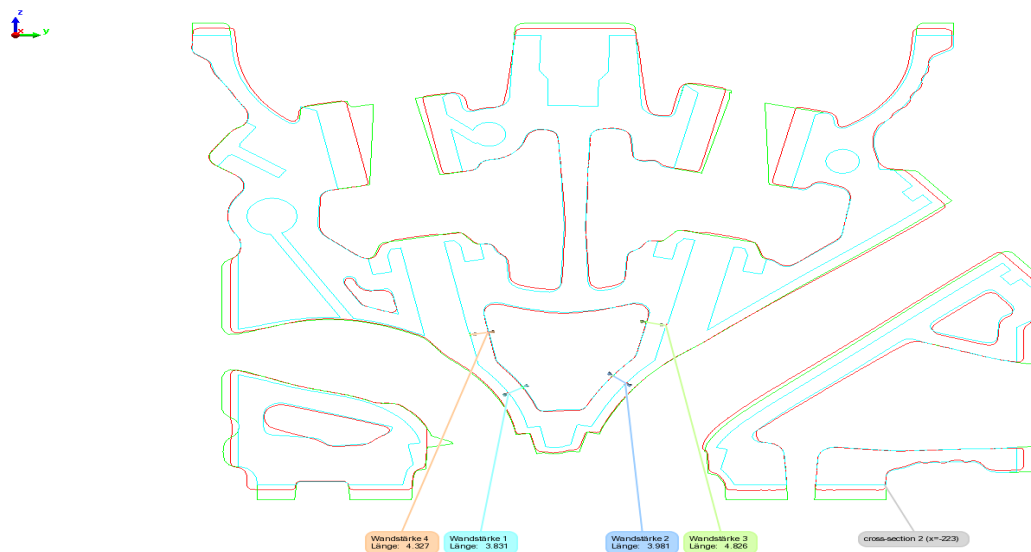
Intersection of 3 Surface mode: Casting CAD mode (green), CT Surface extraction (red) , final part after machining (turquoise)
